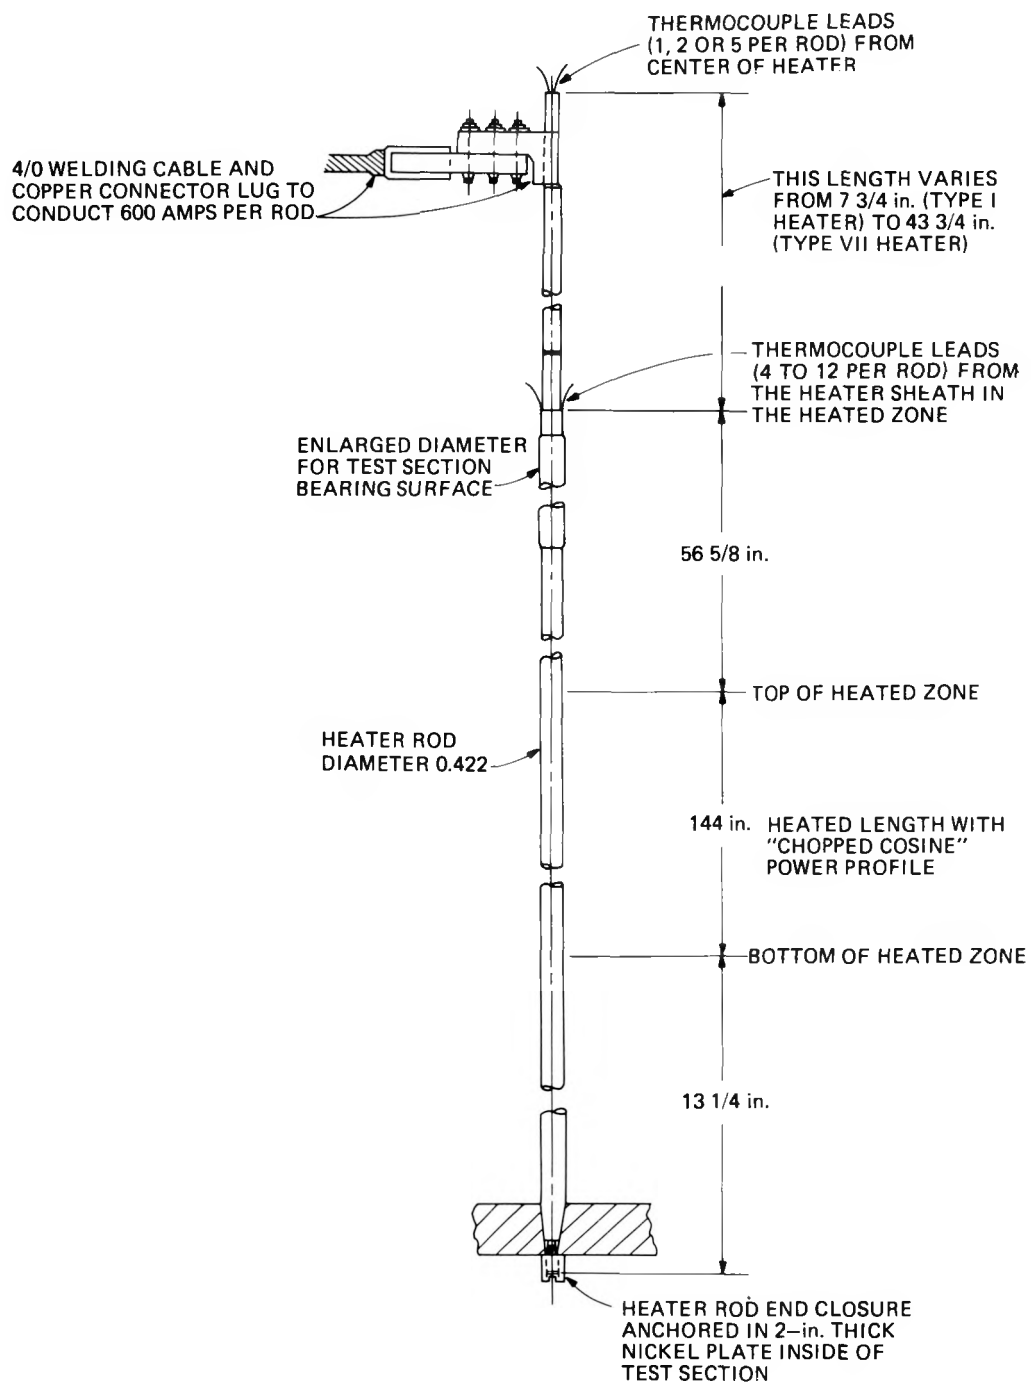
Indirect heater rod assembly (1 in. = 2.54 cm).
